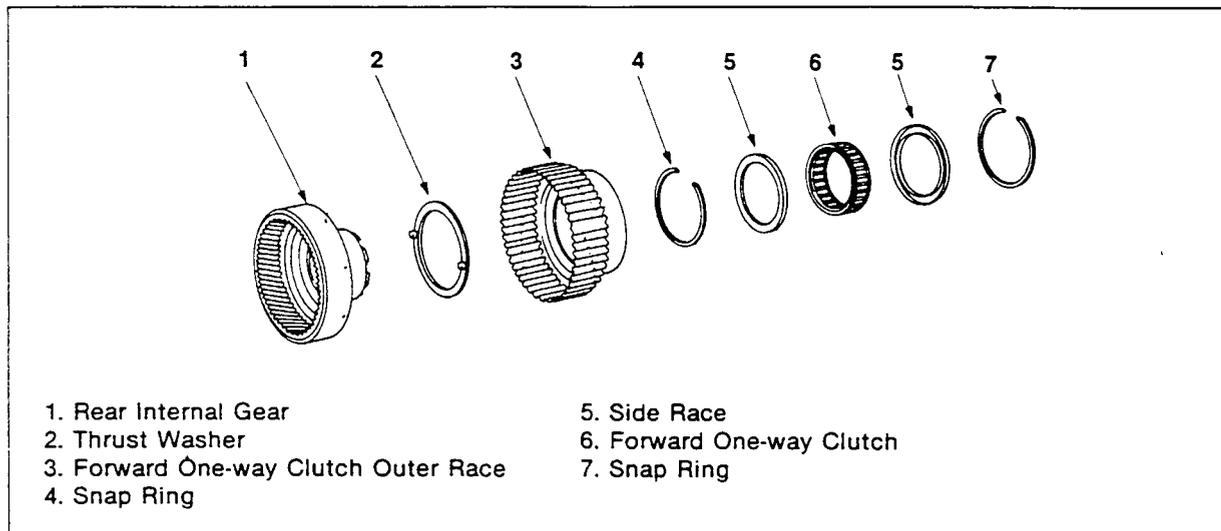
Forward One-way Clutch Outer Race Assembly and Rear Internal Gear
